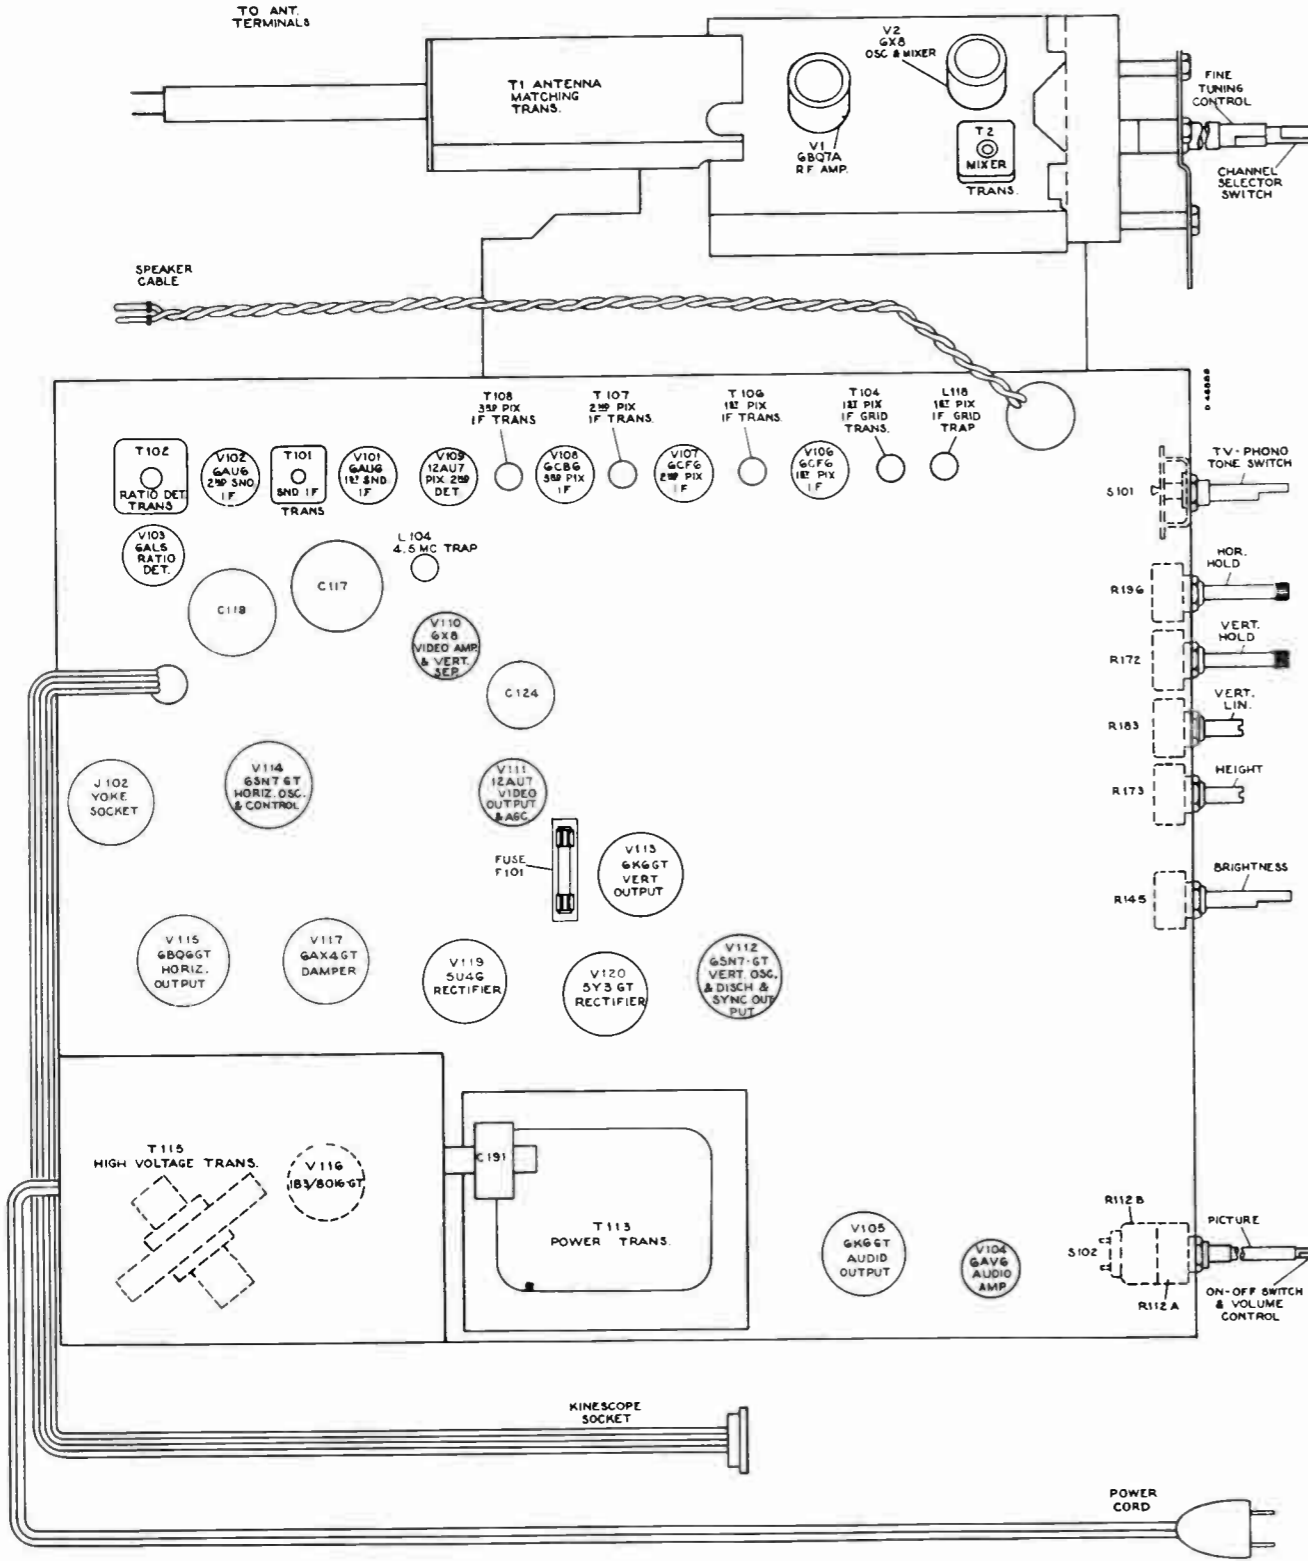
Television Chassis Top View (shown with KRK29 Tuner)
